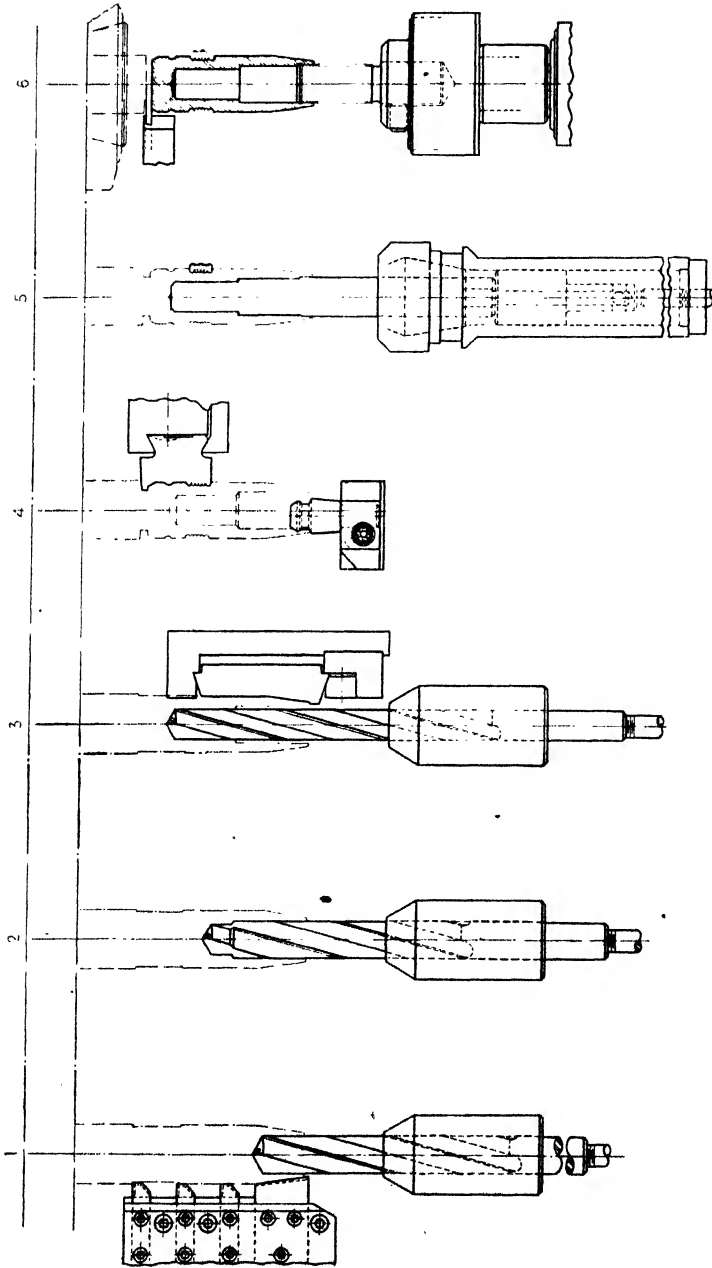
Layout showing the successive operations required in producing a shell from 42-mm. bar stock in a six-spindle automatic screw machine. The operations include: (1) multiple turn and drill, (2) counterbore, (3) drill and form, (4) recess and form, (5) knurl (external) recess and ream, (6) tap and cut off.
